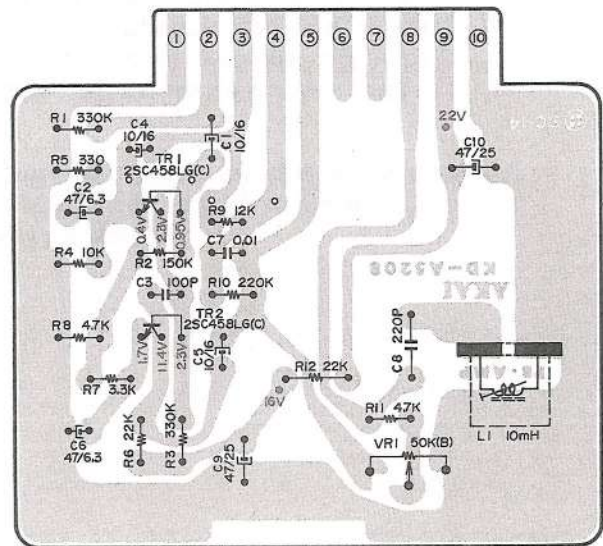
P.B. AMP. P.C. BOARD KD-A5208 (REVERSE SIDE)
